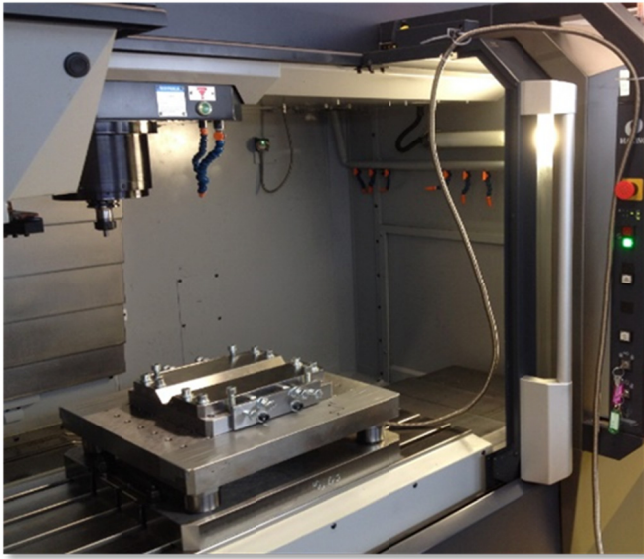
View of 3 – axis CNC milling machine adopted for realizing FSW process
